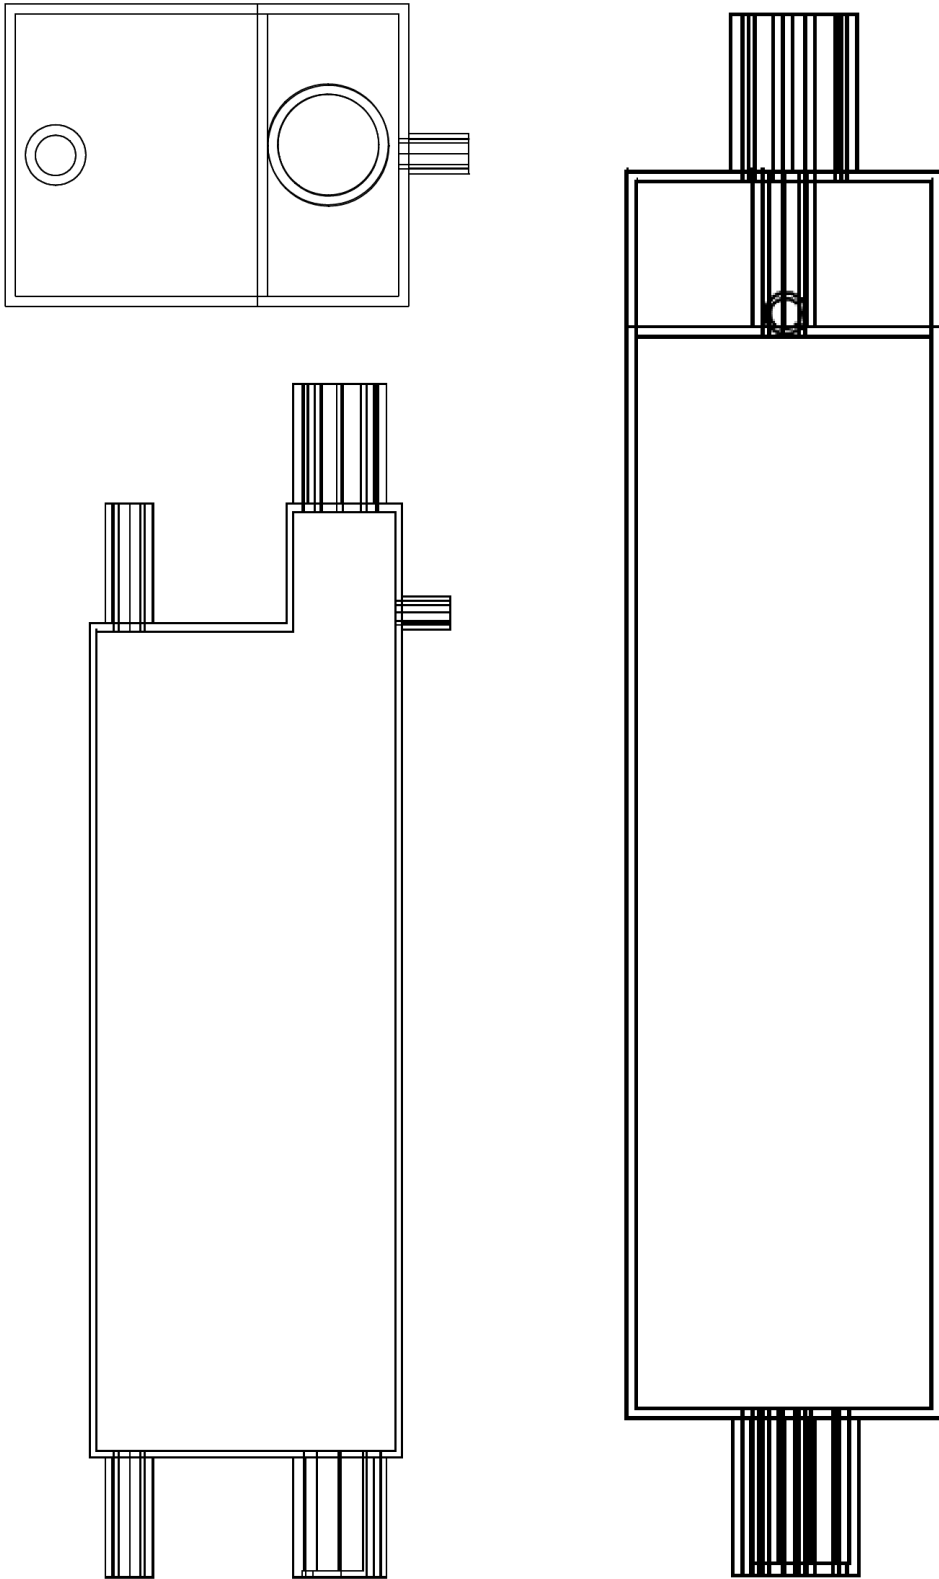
Test section planes of the second design without proportions in DWG TrueView 2016 ®: a) Plant, b) Profile, c) Elevation.
